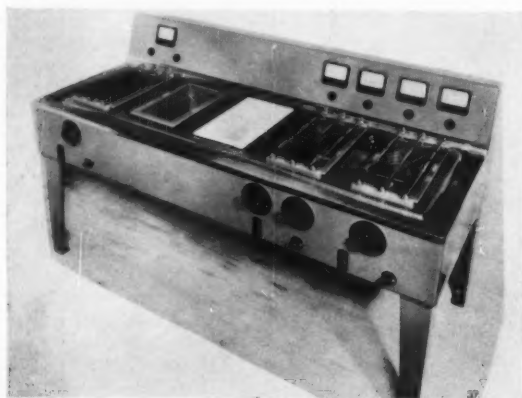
A complete plating assembly having corrosion resistant heatable tanks and controllable D.C. power source.
